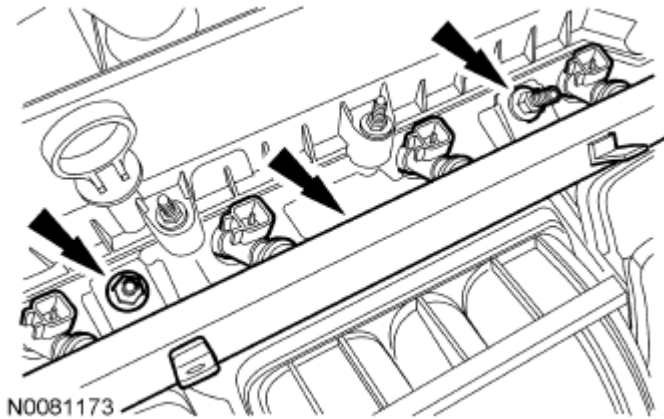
Locating Stud Bolts, Fuel Rail And Fuel Injectors
